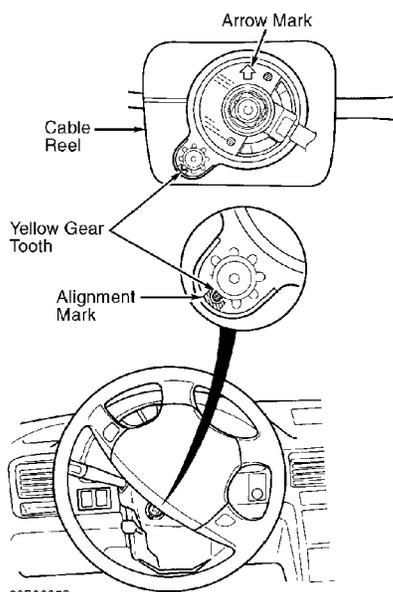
Locating Cable Reel Alignment Marks (Typical)
